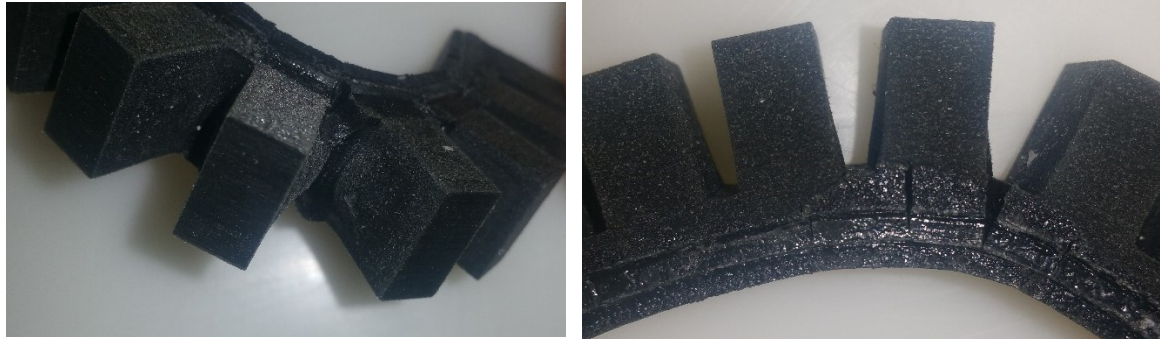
(left) rupture in the 3d-printed pneu-net actuator
